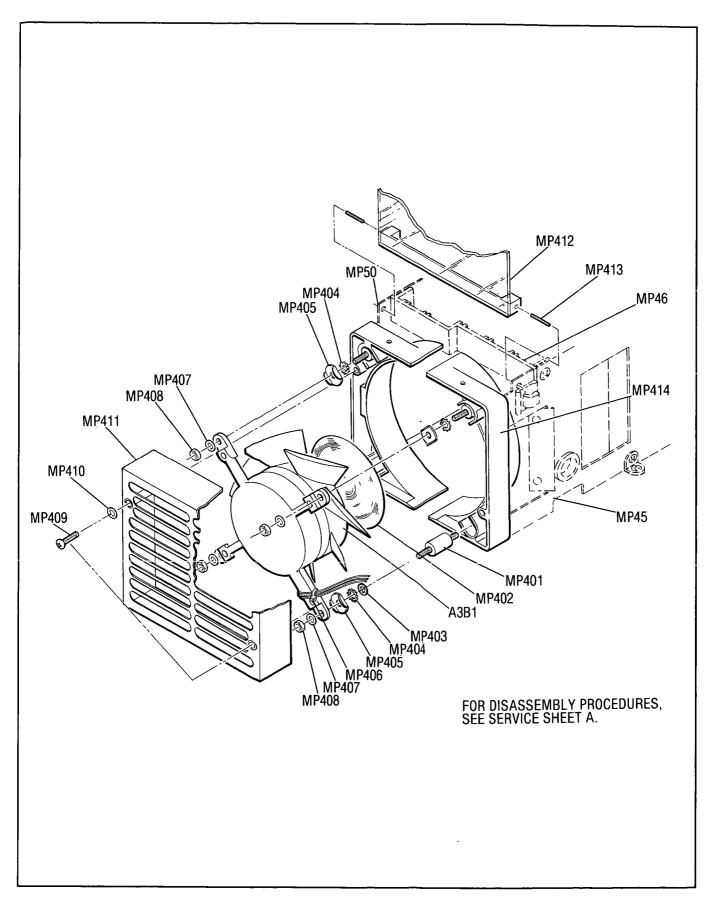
A3 Fan Assembly Illustrated Parts Breakdown
